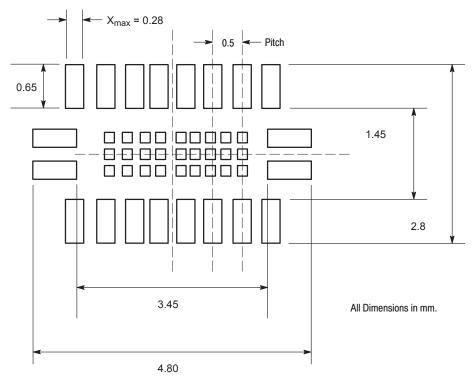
20 Pad QFN Suggested Board Layout (Bottom View)
